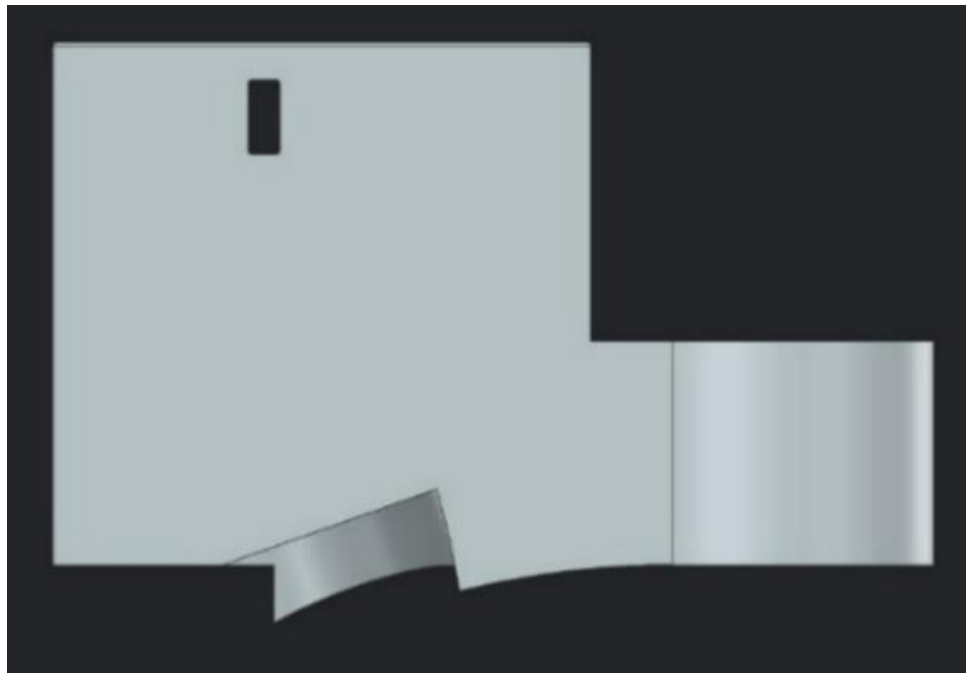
Side View of 3D-Printed Flange Interface and Linear Actuator Mount
